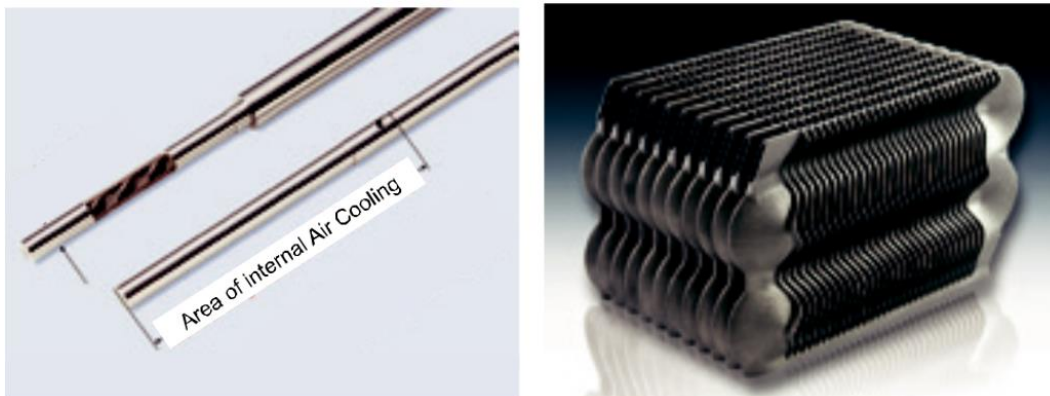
Selective laser melting; Internally cooled pin for injection molds (left), micro cooler made from AlSi10Mg (right).
